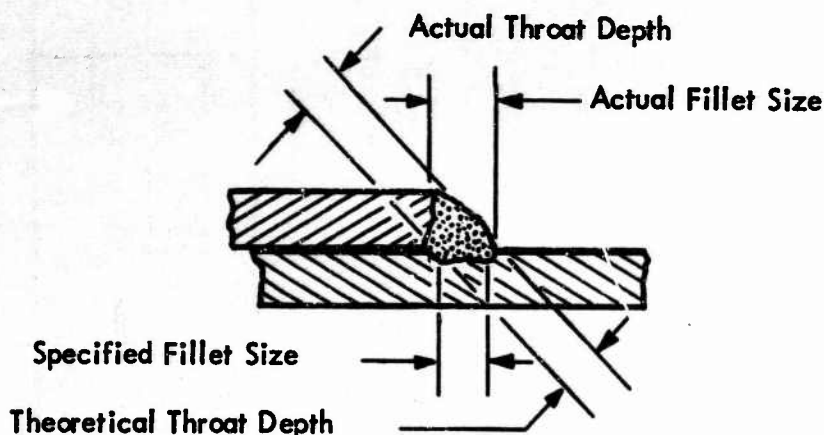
LONGITUDINAL FILLET WELD SHEARING COUPONS
